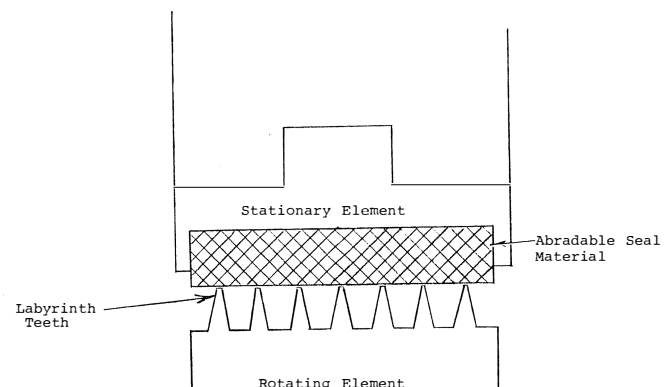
An Example of an Abradable Labyrinth Seal That is Used to Seal Along an Axial Surface.
